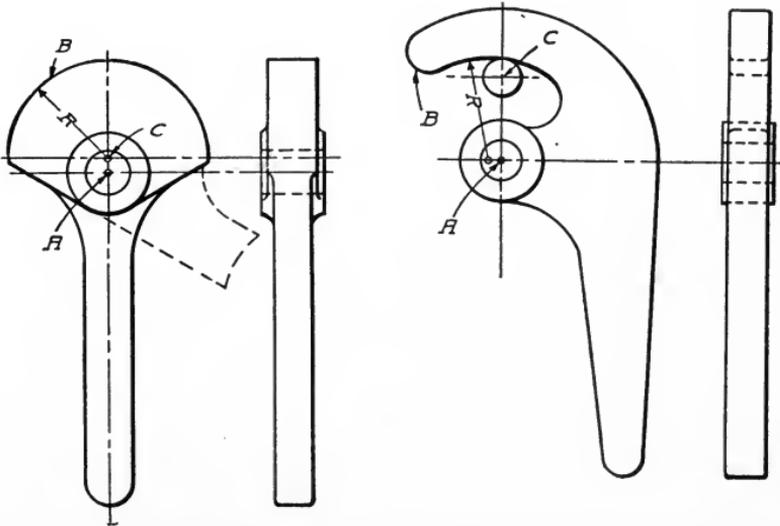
Diagrams Showing Cams or Eccentrics Used for Clamping
